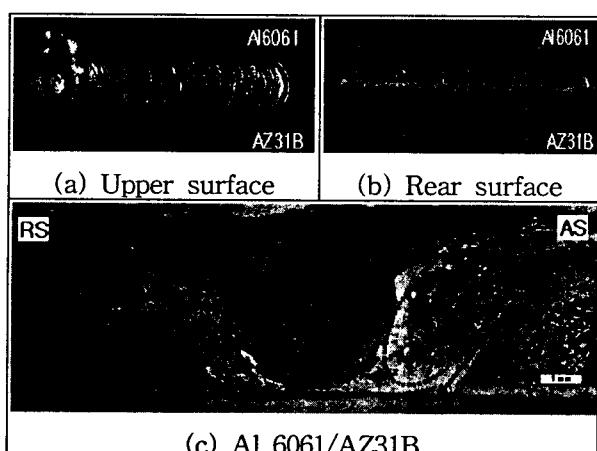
Macrostructures of Friction Stir Welded AZ31B/Al 6061(450rpm,15mm/min, Tool angle 3°)
